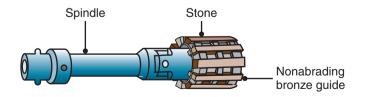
Schematic illustration of a honing tool used to improve the surface finish of bored or ground holes.
